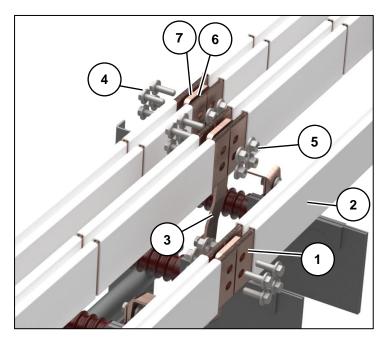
Side view of 1250 A busbar assembly, feeder 1250A
